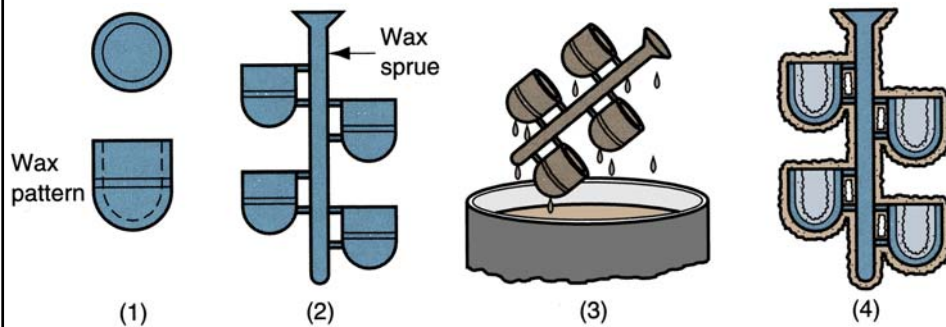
Steps in investment casting: (1) wax patterns are produced; (2) several patterns are attached to a sprue to form a pattern tree; (3) the pattern tree is coated with a thin layer of refractory material; (4) the full mold is formed by covering the coated tree with sufficient refractory material to make it rigid.
